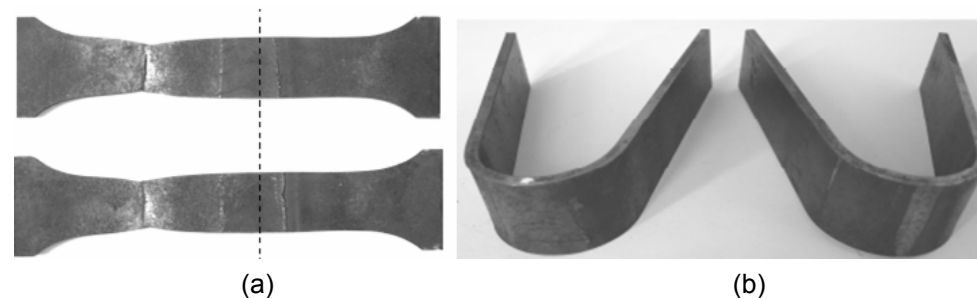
Welded joints for S235 JR+N –static tensile tests (a) and the welded samples after static bending test (b) (Cojocaru, 2011)
